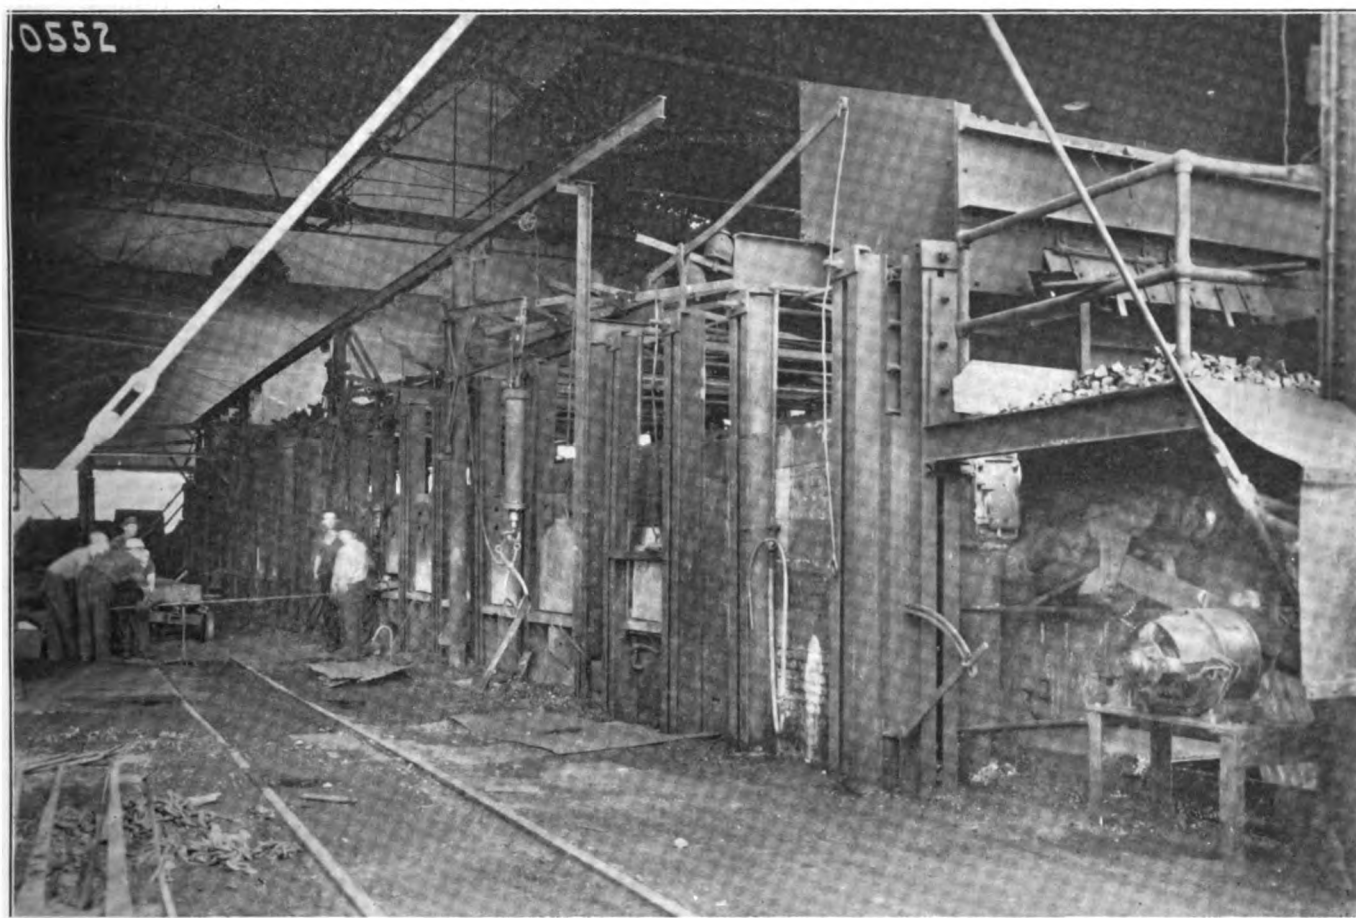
General view of billet heating furnace showing method of driving underfeed stoker with motor—Spang Chalfant Co., Pittsburgh, Pa.
